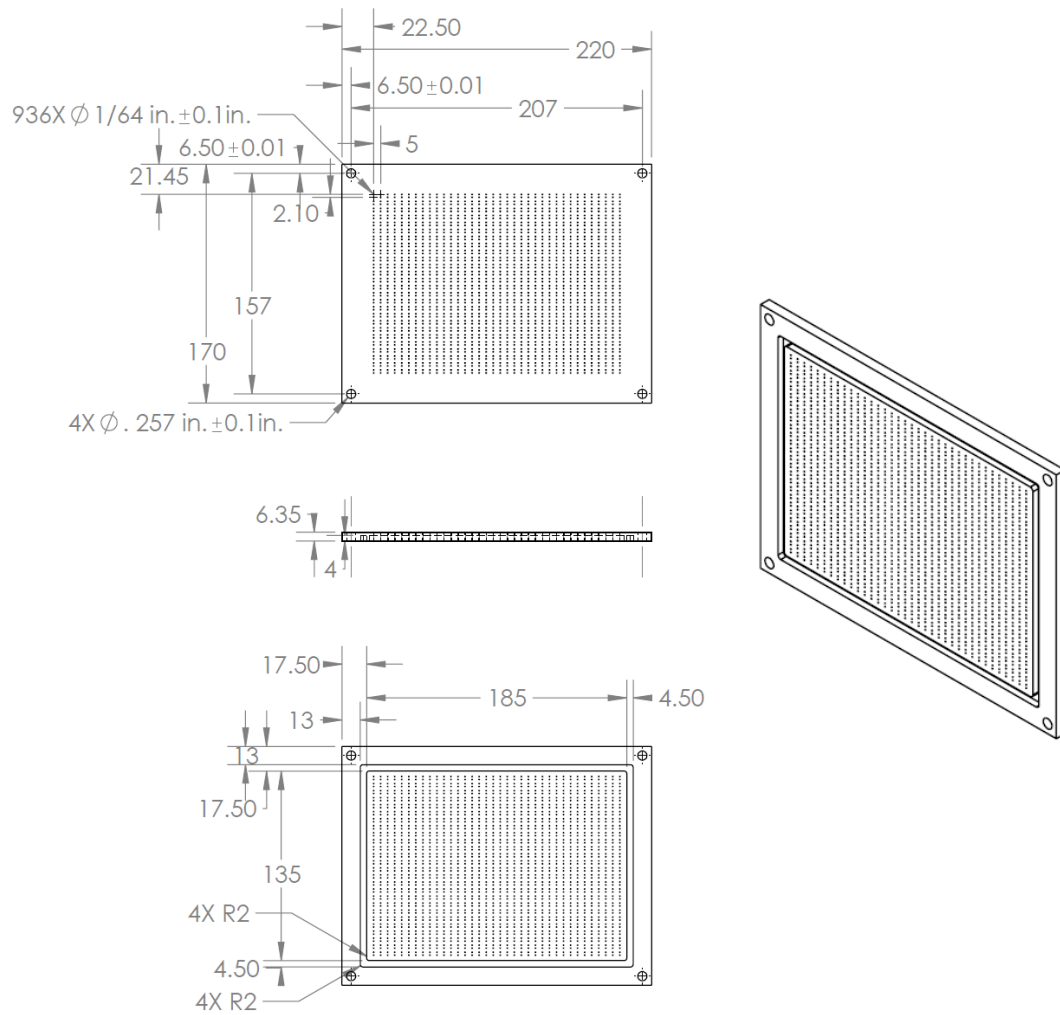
The ridge plate for our final design. All dimensions are in mm with a tolerance of 0.1 mm unless other specified.
